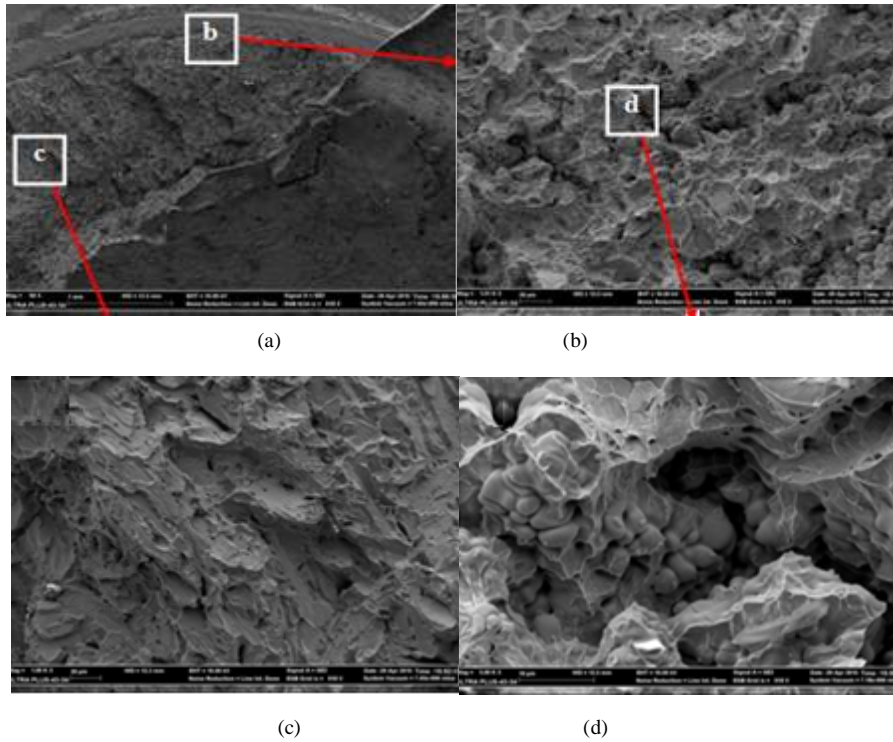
Fracture surface acquired after the cross tensile test, (a) macro view, (b),(d) weld nugget-HAZ interface, (c) weld nugget.
